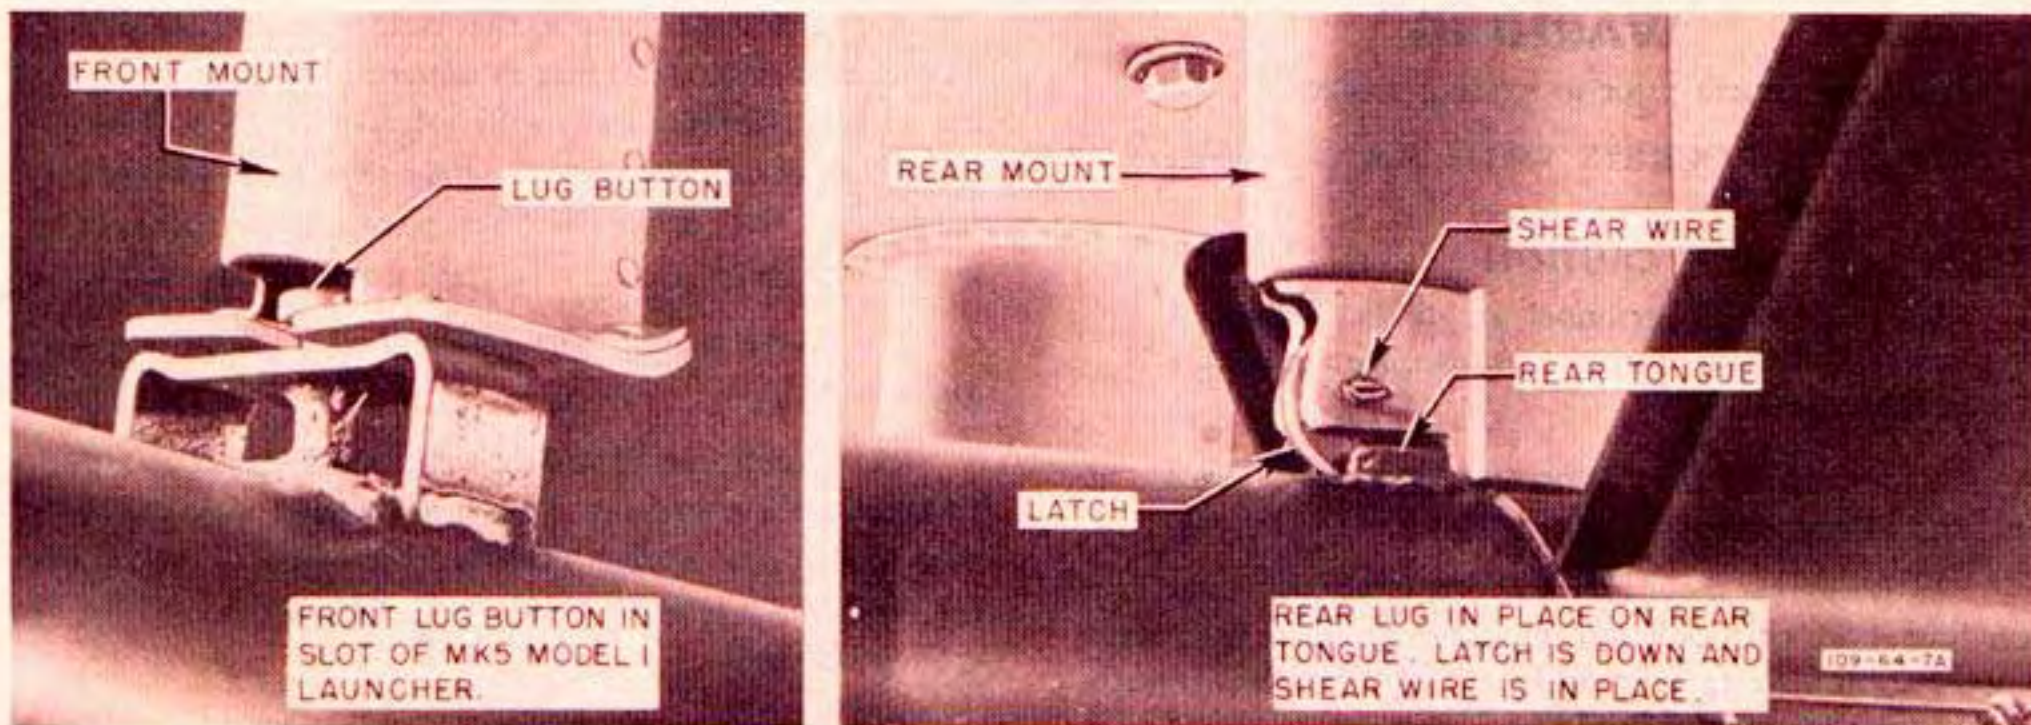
A—Rocket Launcher Mounts With Rocket Installed
